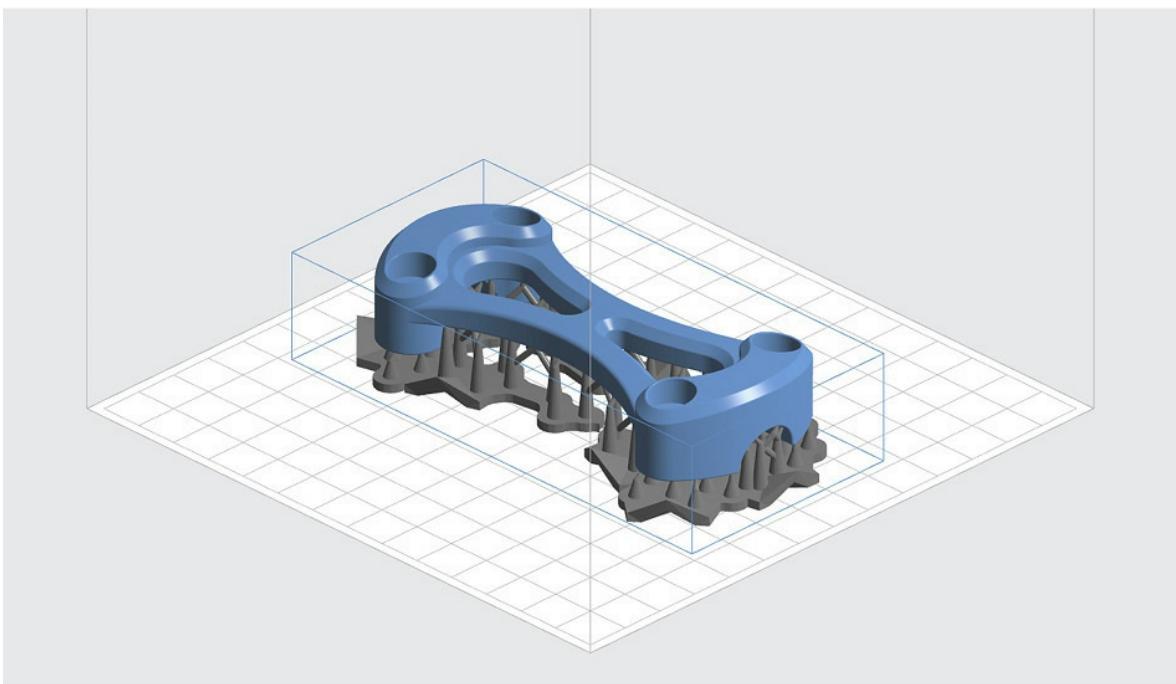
Parts printed on top down machines can be orientated flat, requiring minimal support material
